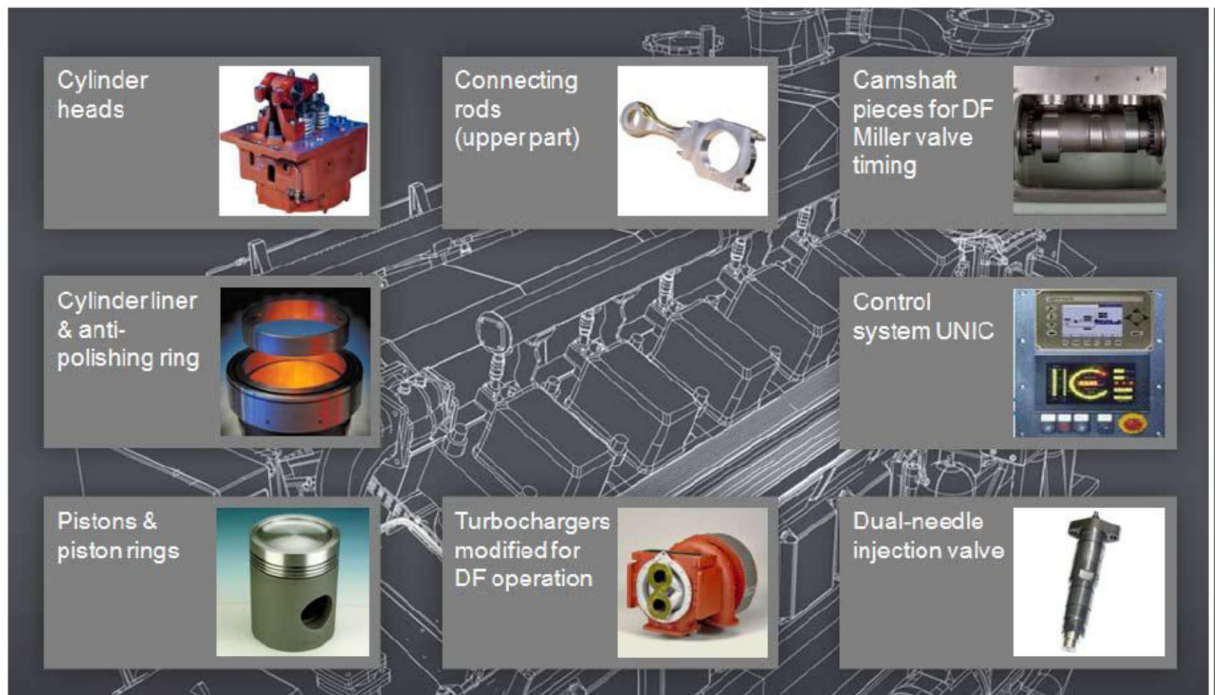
Conversion of the engine to operate with LNG – Parts which will be exchanged [3]
